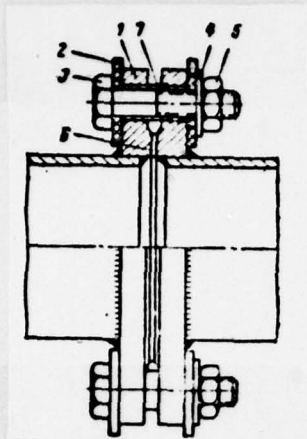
Insulating flange. 1 - flange; 2, - insulating washer (Paronit); 3 - bolt; 4 - washer; 5 - nut; 6 - packing (Paronit); 7 - insulating bush (Paronit).
